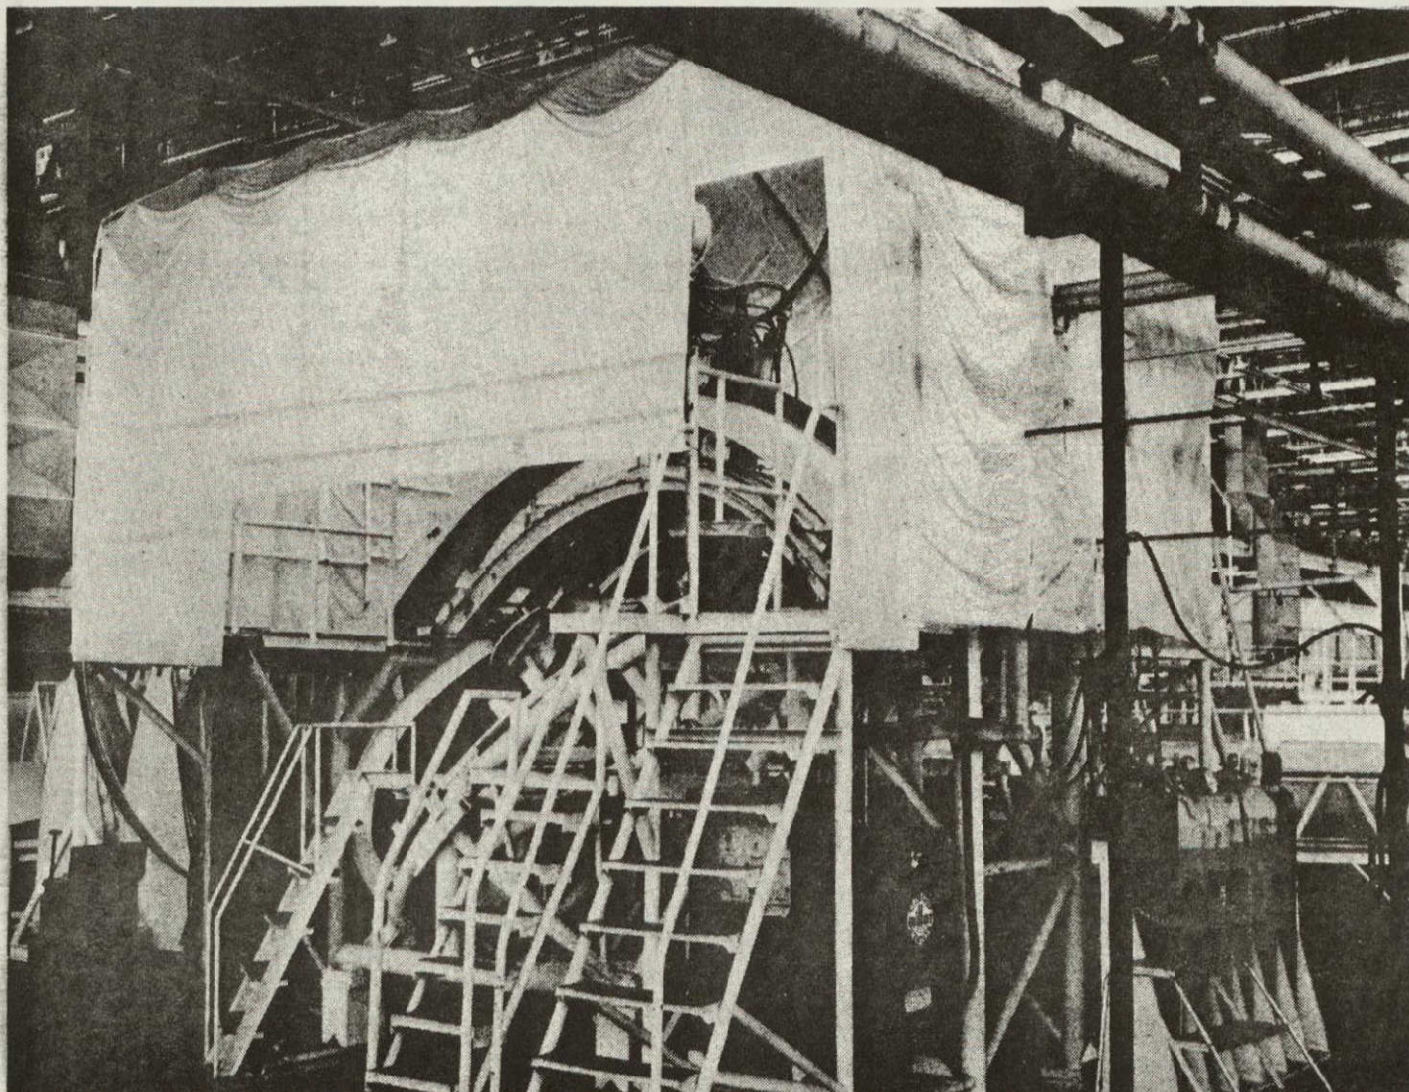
Centaur bulkhead weld fixture.
